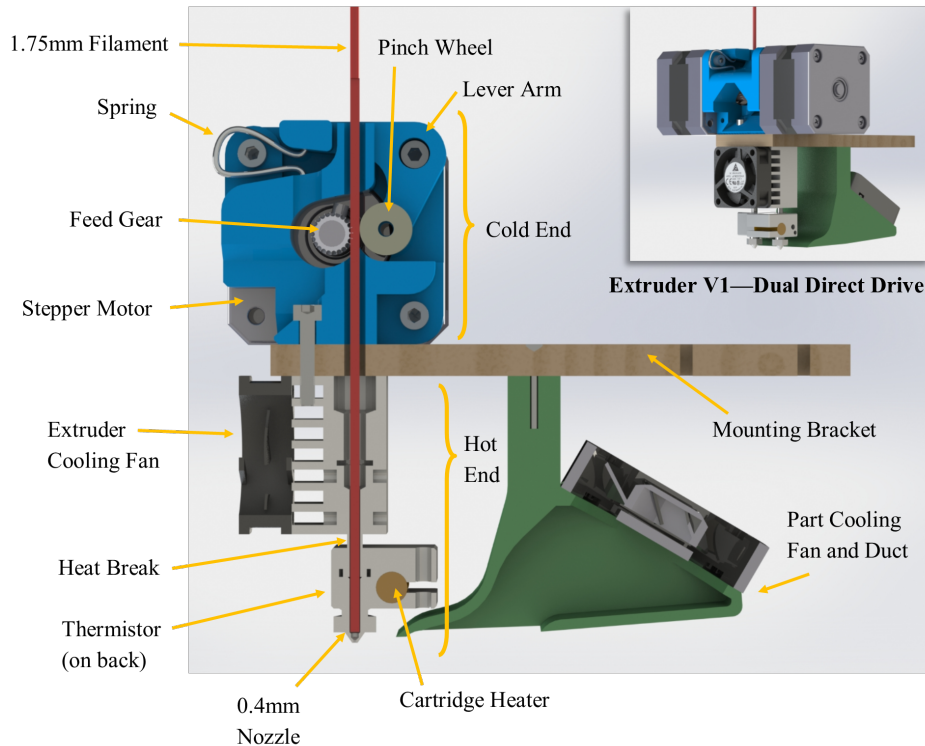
Cutaway side view of the direct drive extruder. Inset shows how this arrangement is mirrored to provide two extruders for use with multiple materials.
